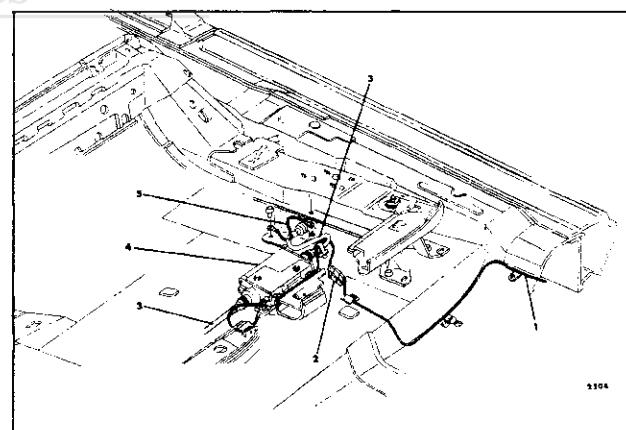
Horizontal Bench Seat Wiring - Buick and Oldsmobile "C" Body
